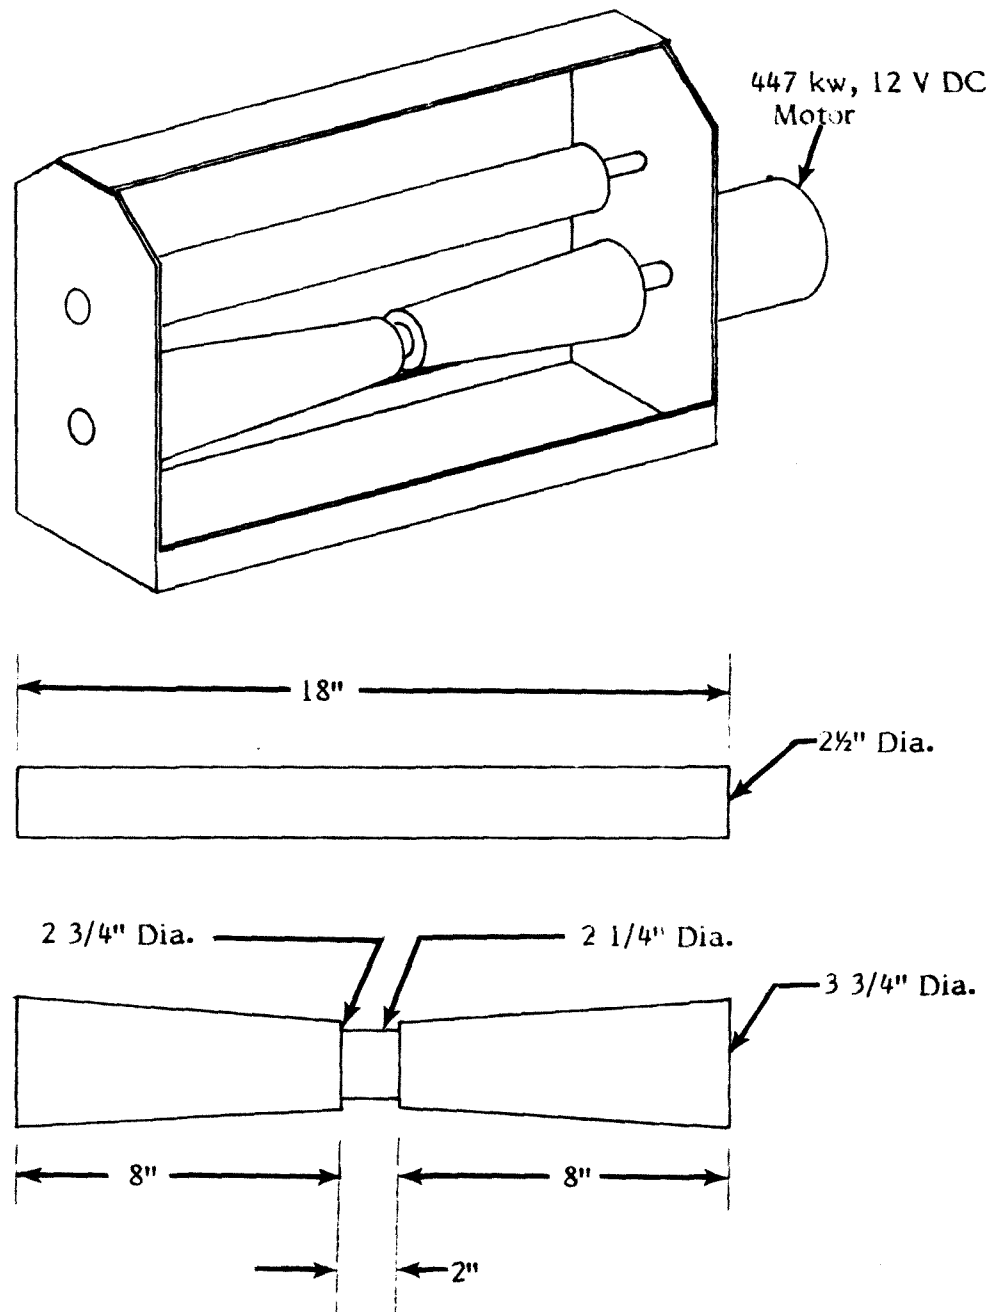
Typical assembly of Petro-Trap wringer rollers.
